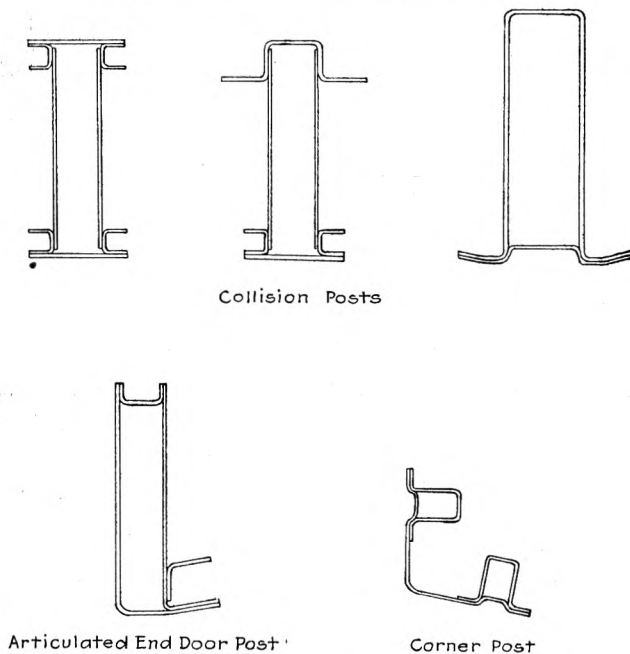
DETAILS OF STAINLESS-STEEL SECTIONS
